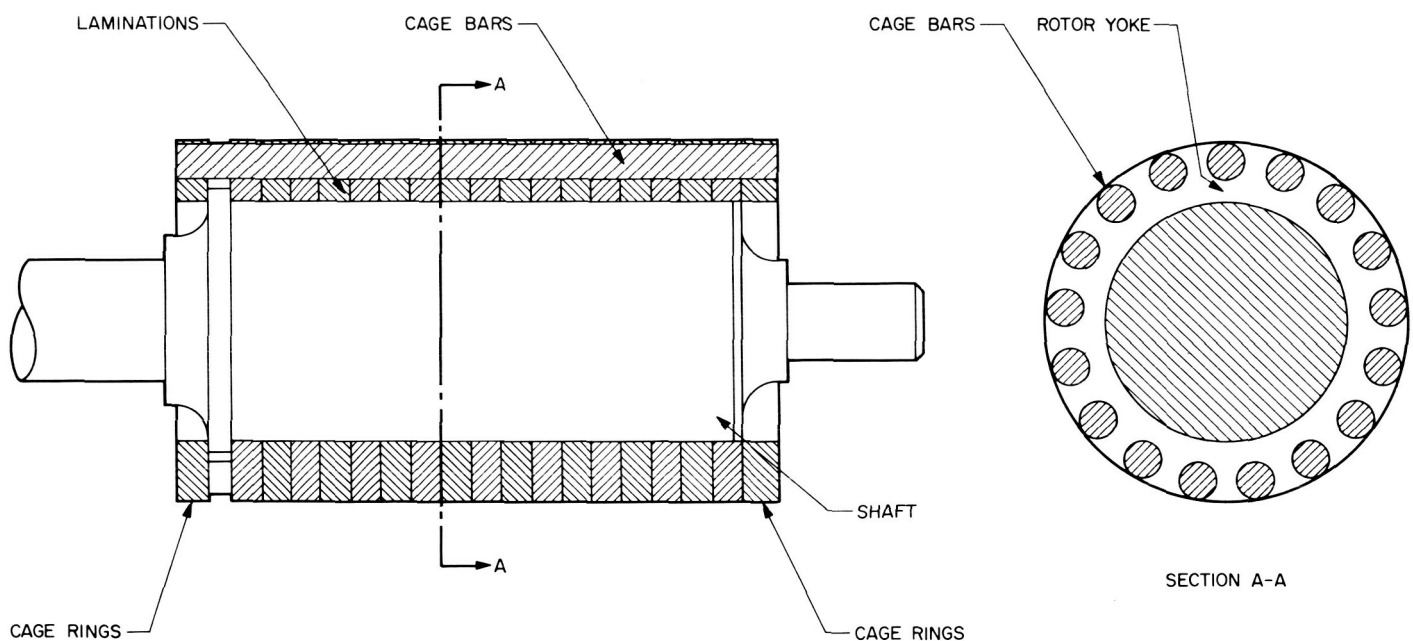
Cross-section of a rotor of a hysteresis induction motor
